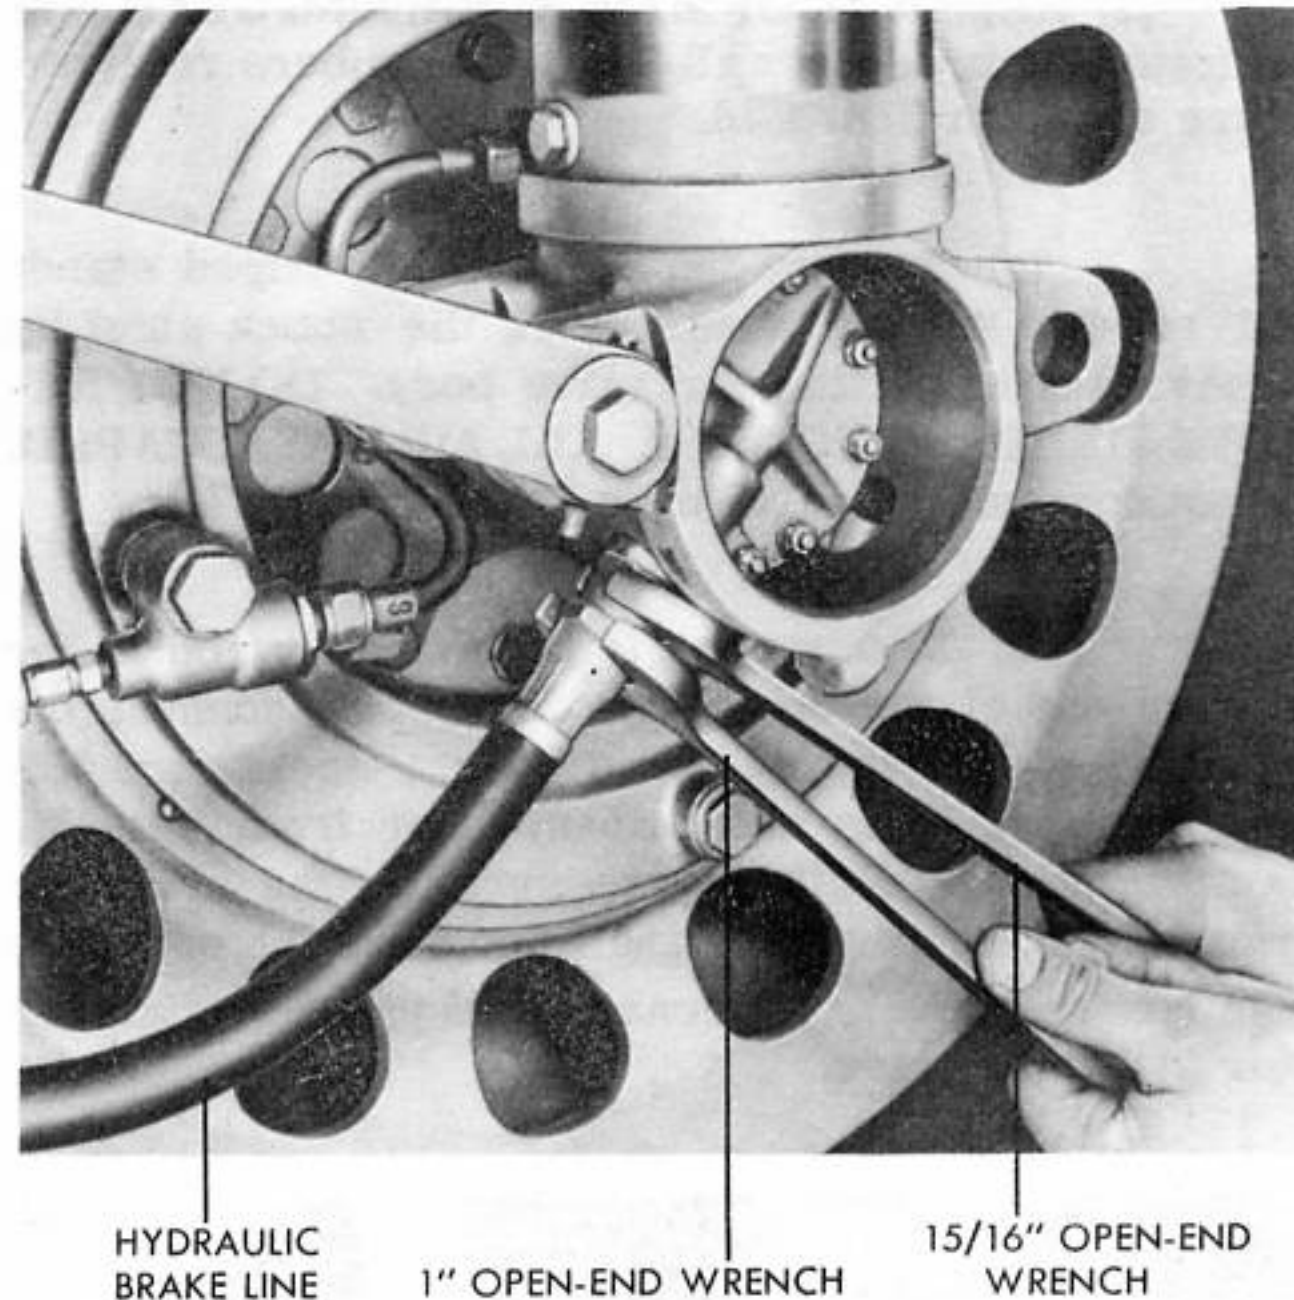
DISCONNECTING HYDRAULIC LINE AT BRAKE DEBOOSTER
